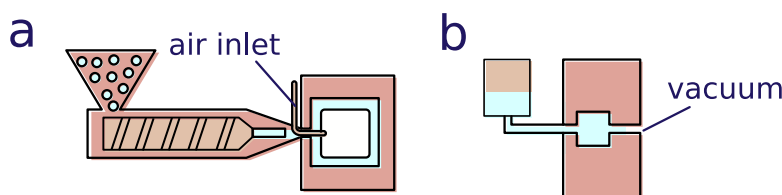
Besides reaction injection molding (for thermosetting elastomers) and thermoplastic injection molding (for thermoplastic elastomers), other types of injection molding exist. (a) blow molding for hollow structures. (b) vacuum-assisted resin transfer molding (VARTM). Images are made available under CC BY-SA 4.0. (DOI: 10.5281/zenodo.5235945)^[156]
